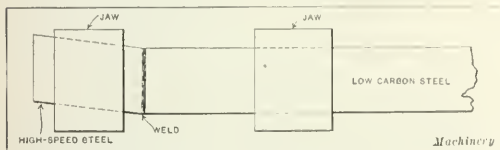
Showing the Proper Relation of High-speed Steel and Low-carbon Steel Stock in the Welder Jaws
